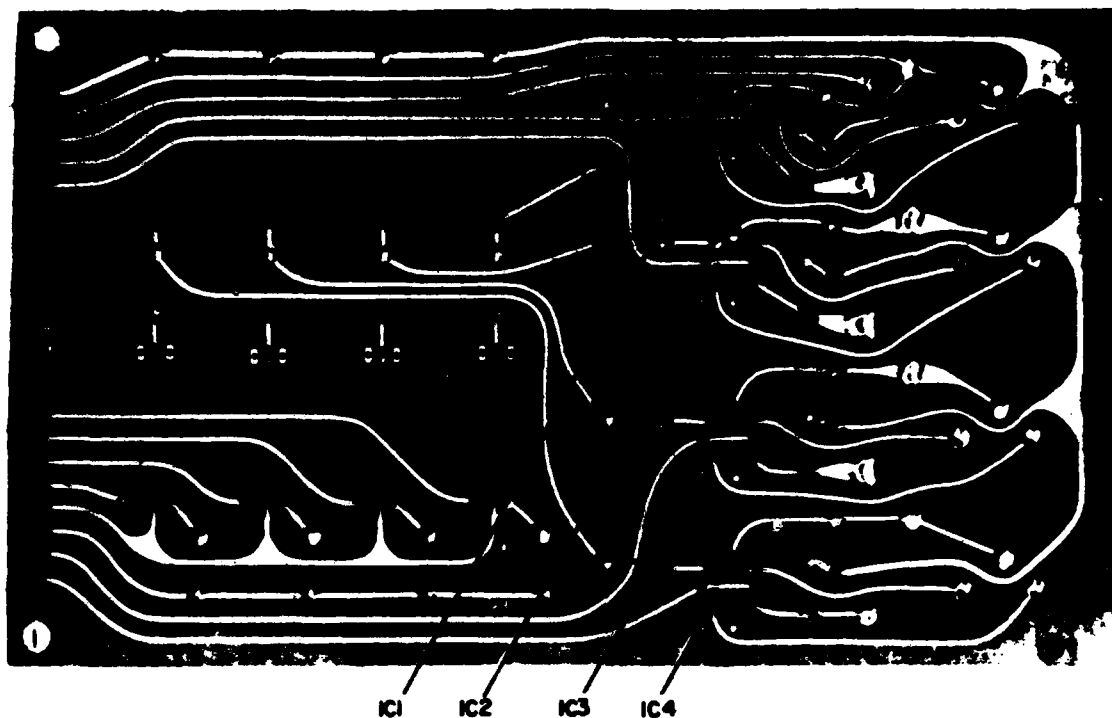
Mod 2 Sample-and-Hold Board (foil side)
